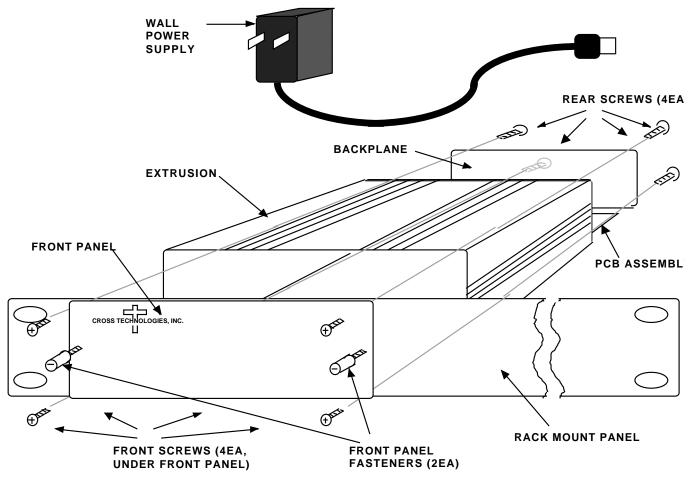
SERIES 2700 ASSEMBLY DRAWING
